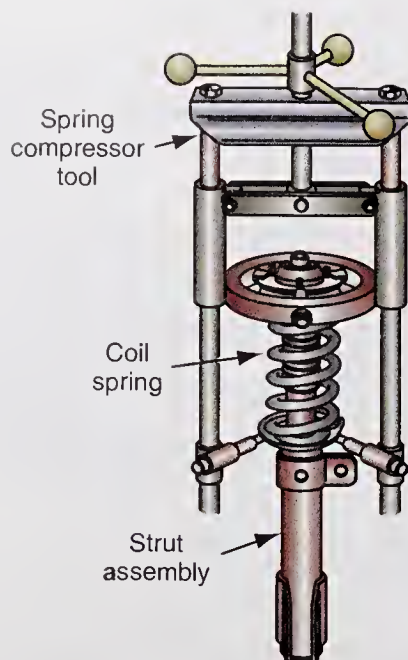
Coil spring and strut assembly mounted in a spring compressing tool.
